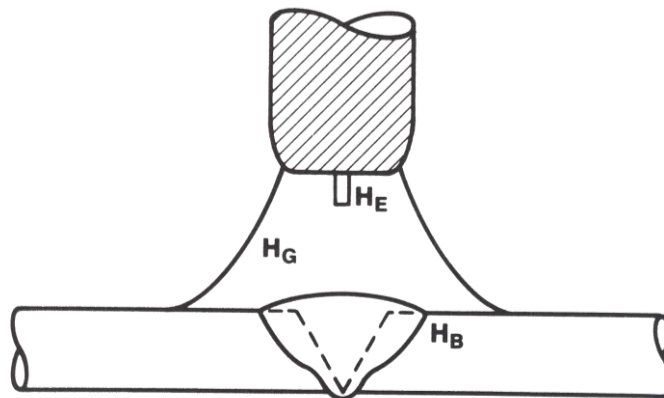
Sources of hydrogen in gas-metal arc welding. H_G , hydrogen from shielding gas; H_E , hydrogen from electrode; H_B , hydrogen from base metal. This image can be adapted for TIG welding by removing the electrode and adding a filler rod from the side.^[6]
